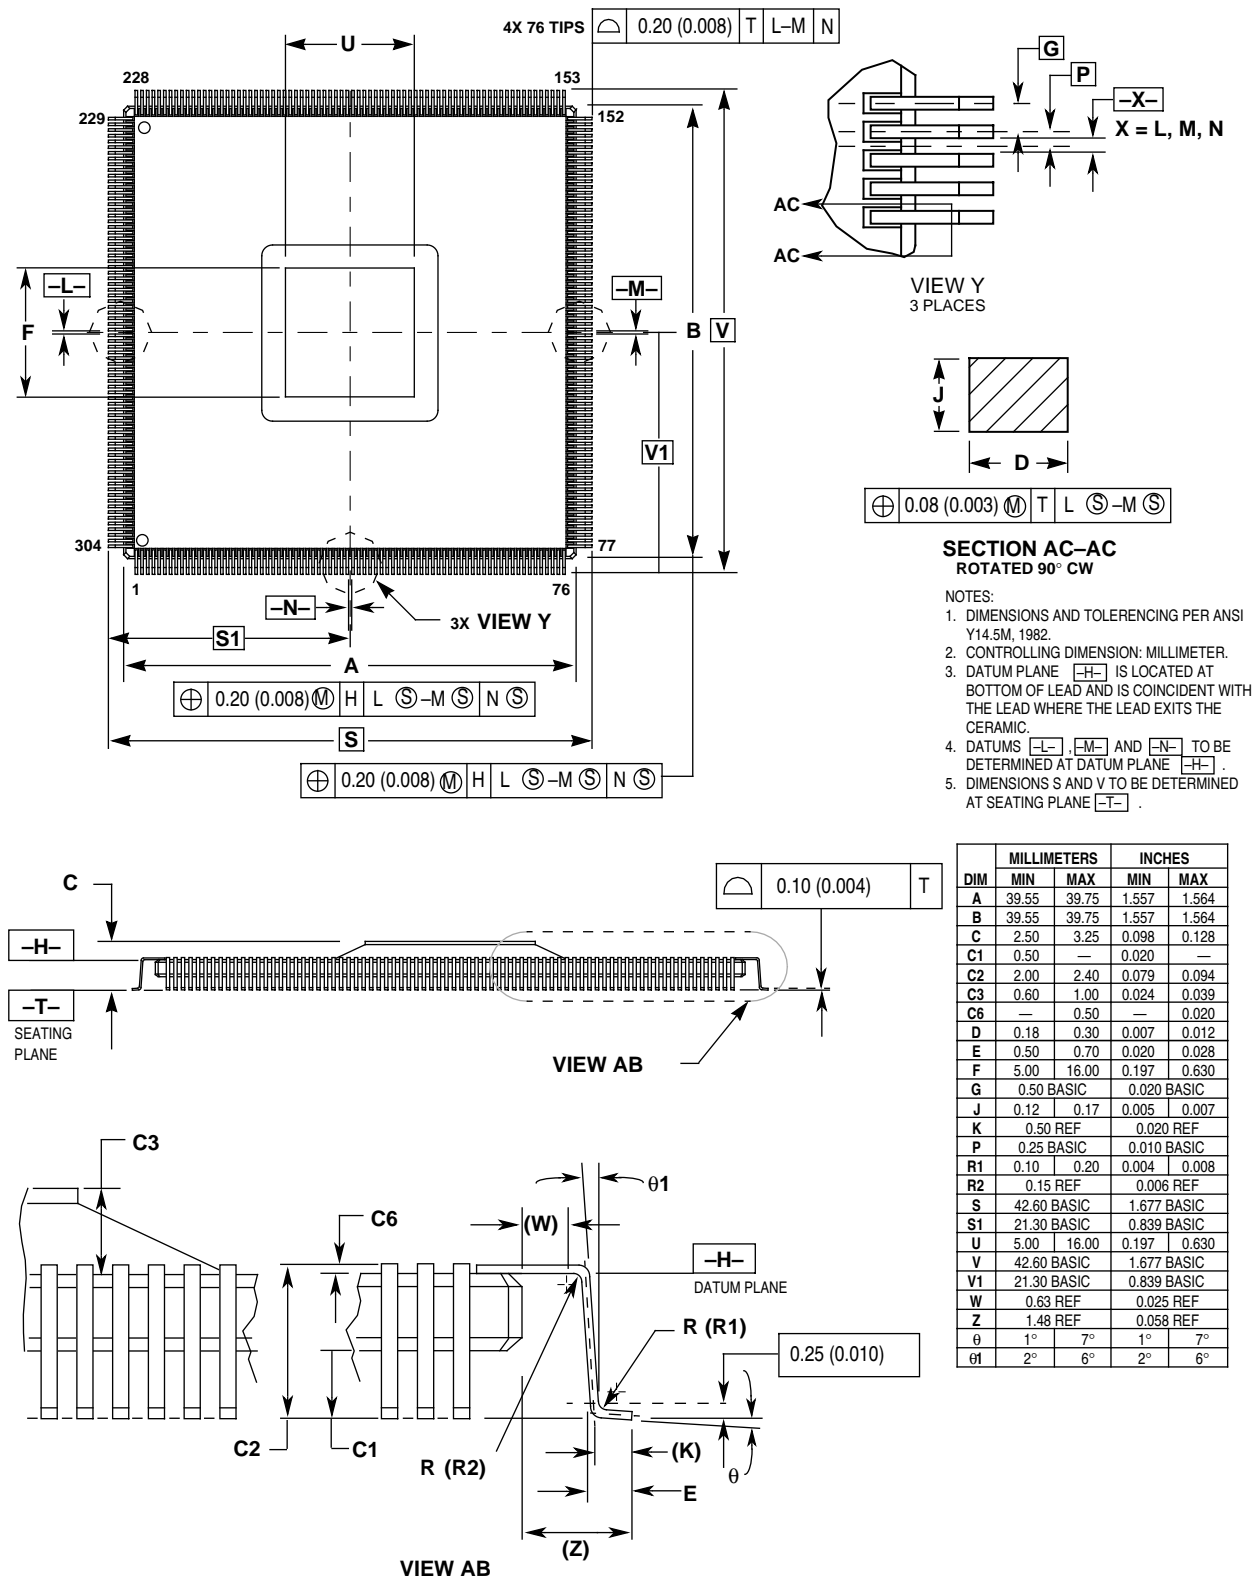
Mechanical Dimensions of the Motorola C4-CQFP Package
